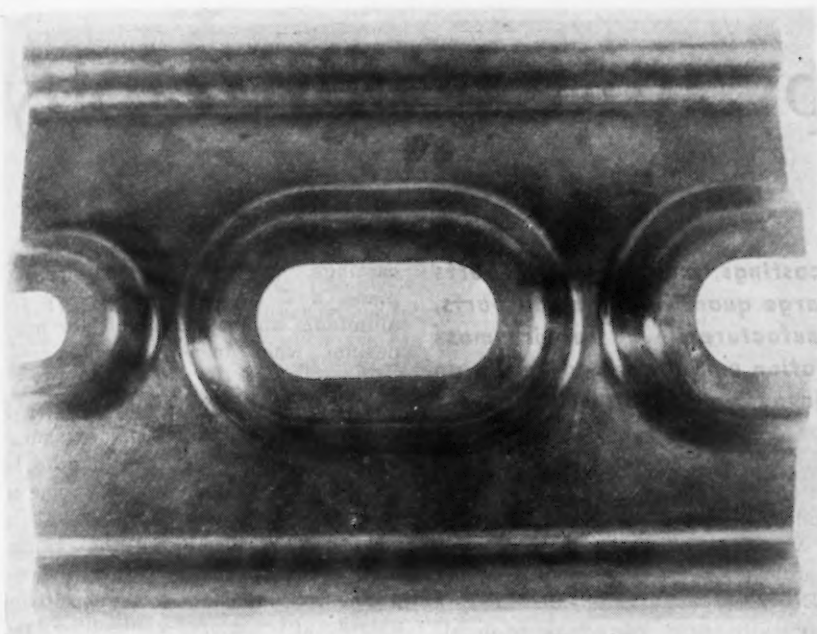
View of back of inner skin frame molded on Kirksite dies from Resin X-crepe paper, shown after trimming and routing.
